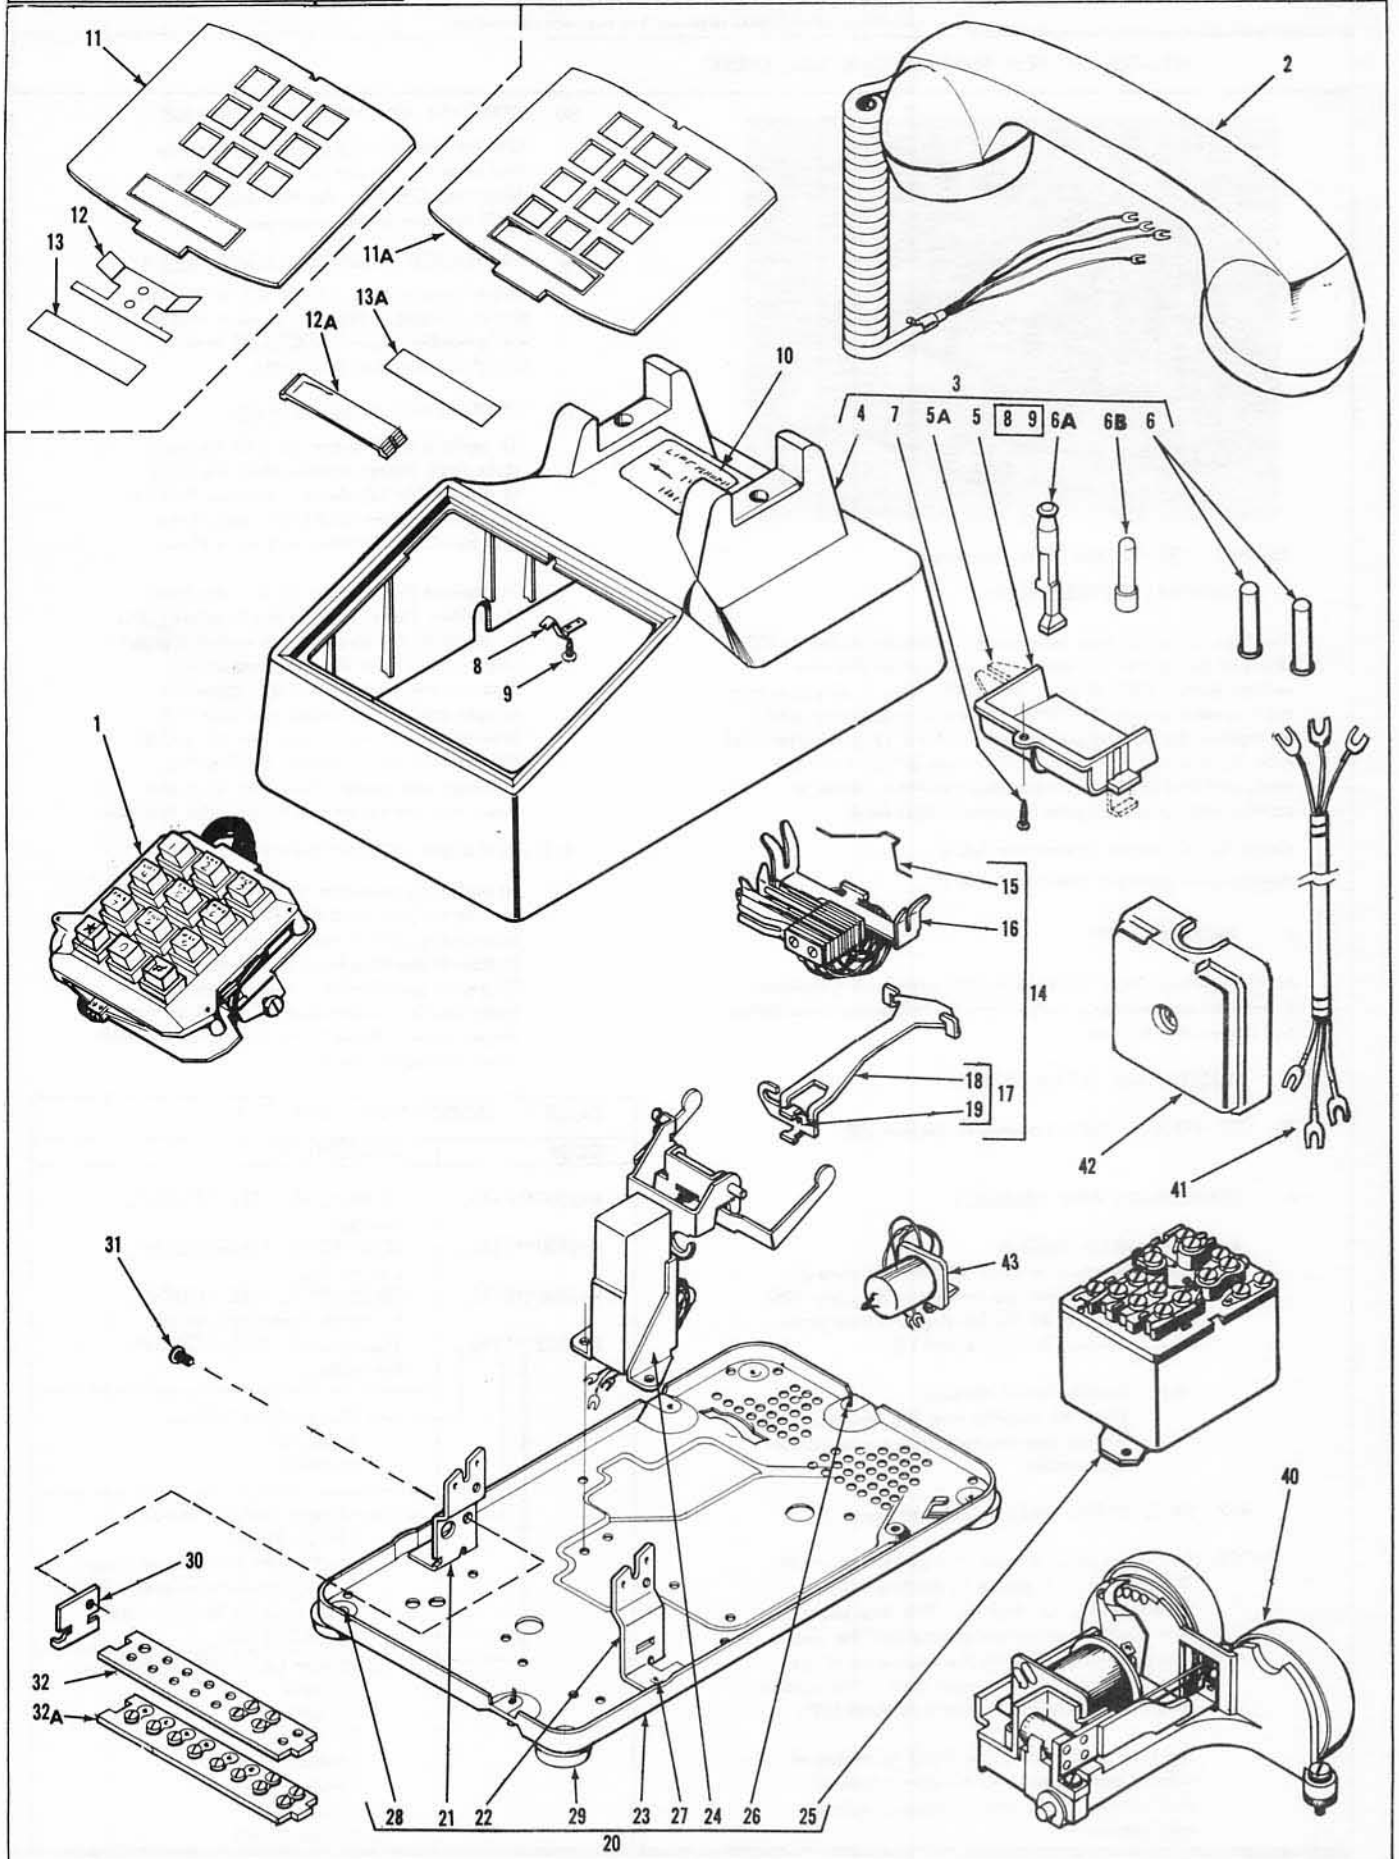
Single line "TEL-TOUCH" desk telephones, exploded view.
